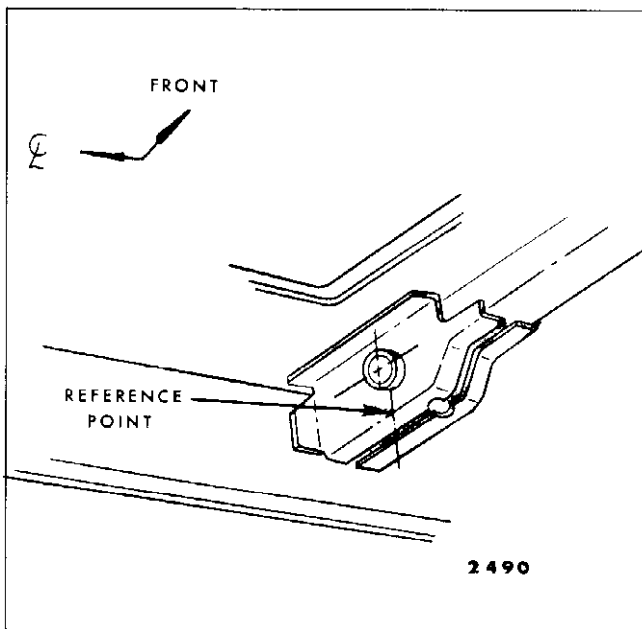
Side Rail at Spring Rear Shackle Hole
